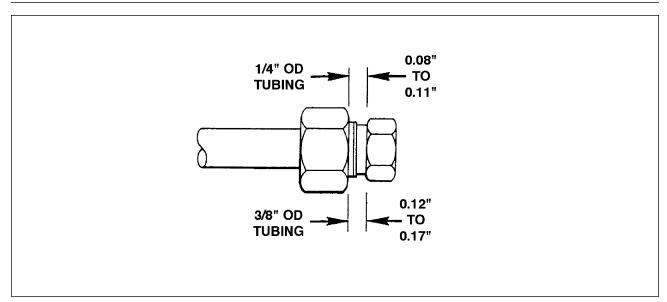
Tolerances, Union Nut and Tubing Nut
